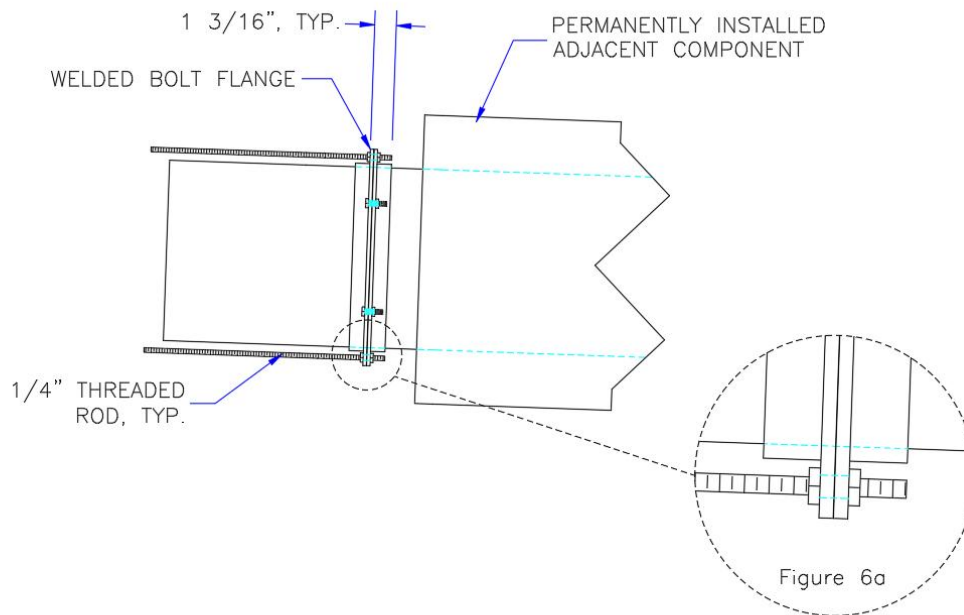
Tighten 2 Threaded Rods to opposite sides of the VLS.
